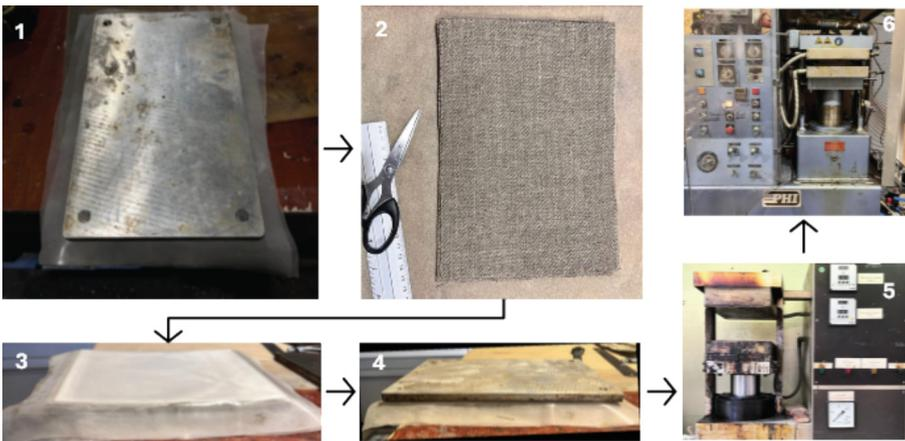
Manufacturing of Reformable flax-PLA laminate: (1) Preparing the mold; (2) Cutting the flax fabric; (3) Stacking flax fibre, PLA film and protective silicone sheet; (4) Placing the top mold; (5) Hot-pressing; (6) Cold pressing.
